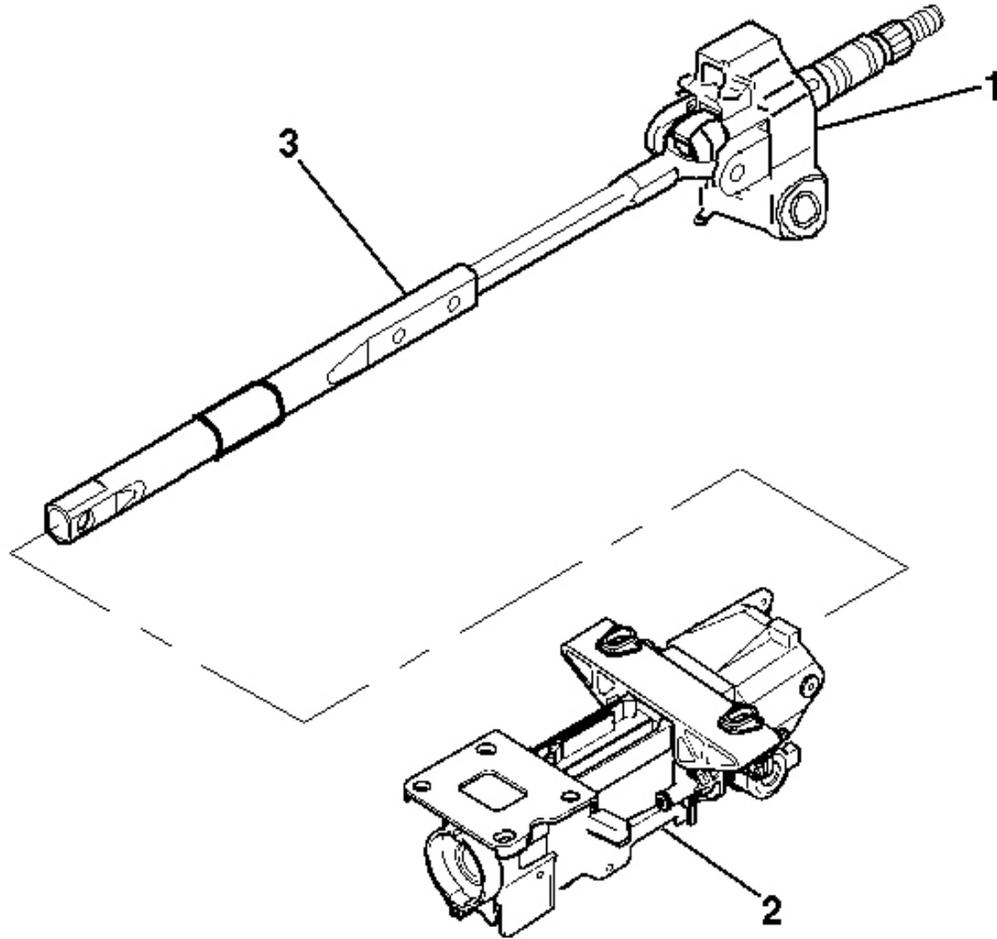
View Of Tilt Head Assembly & Steering Shaft Assembly
